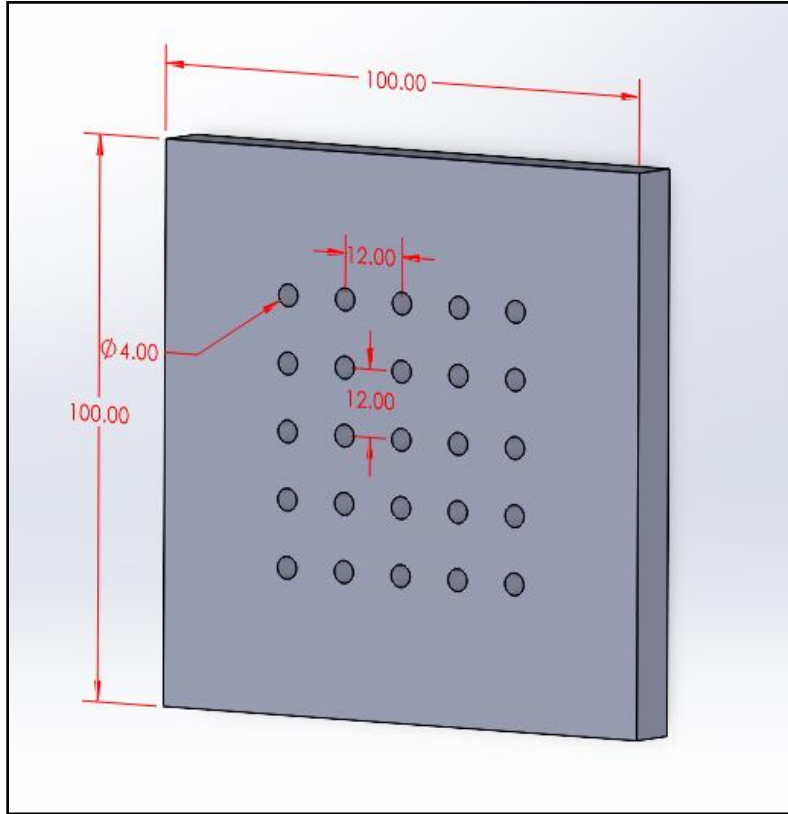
Baseline nozzle plate design and dimensions (in mm)
